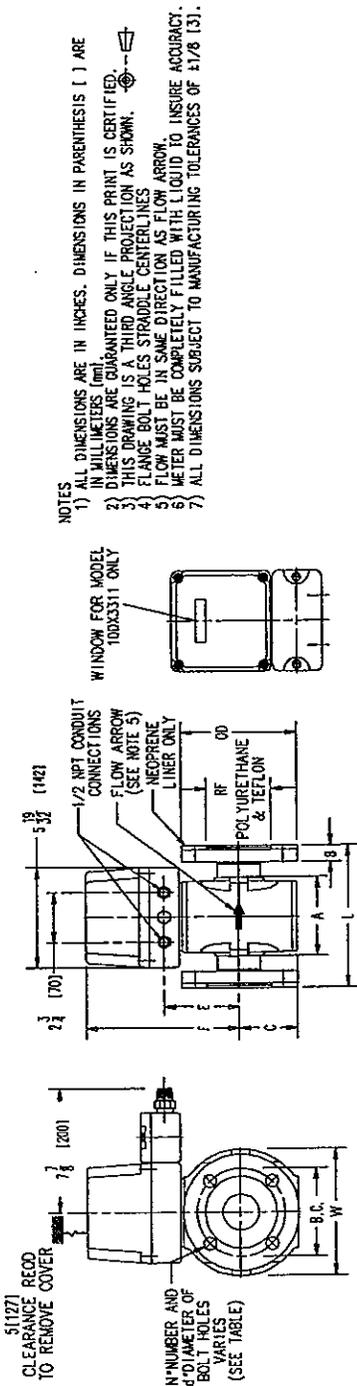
OUTLINE DIMENSIONS, INTEGRAL CONVERTER WITH ANSI FLANGES (OD-10D-4124, R1)
